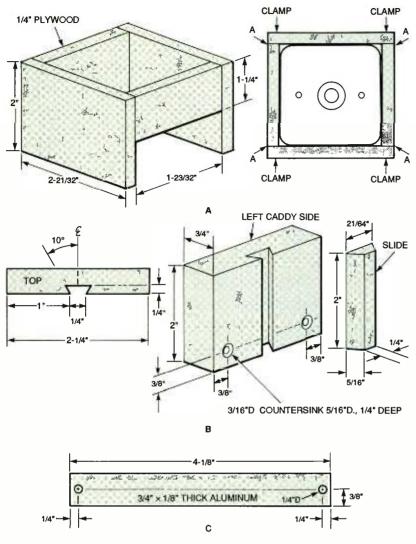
The drill holder (A), the caddy sides and slide (B), and the side stretcher (C) are the drill-holder components shown here.
